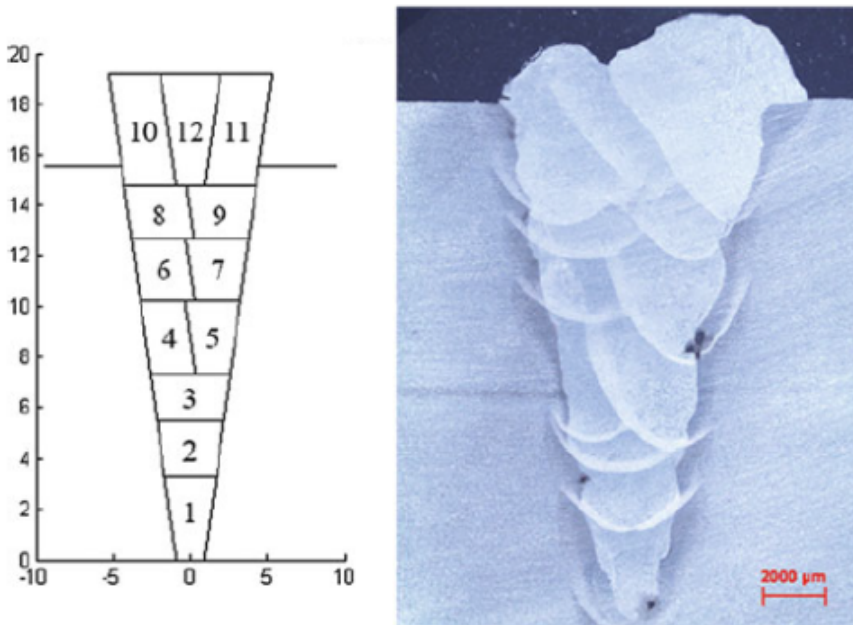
Multiple-pass welding experiment, Huang et al. (2015). Left: welding sequence layout. Right: metallographic section
